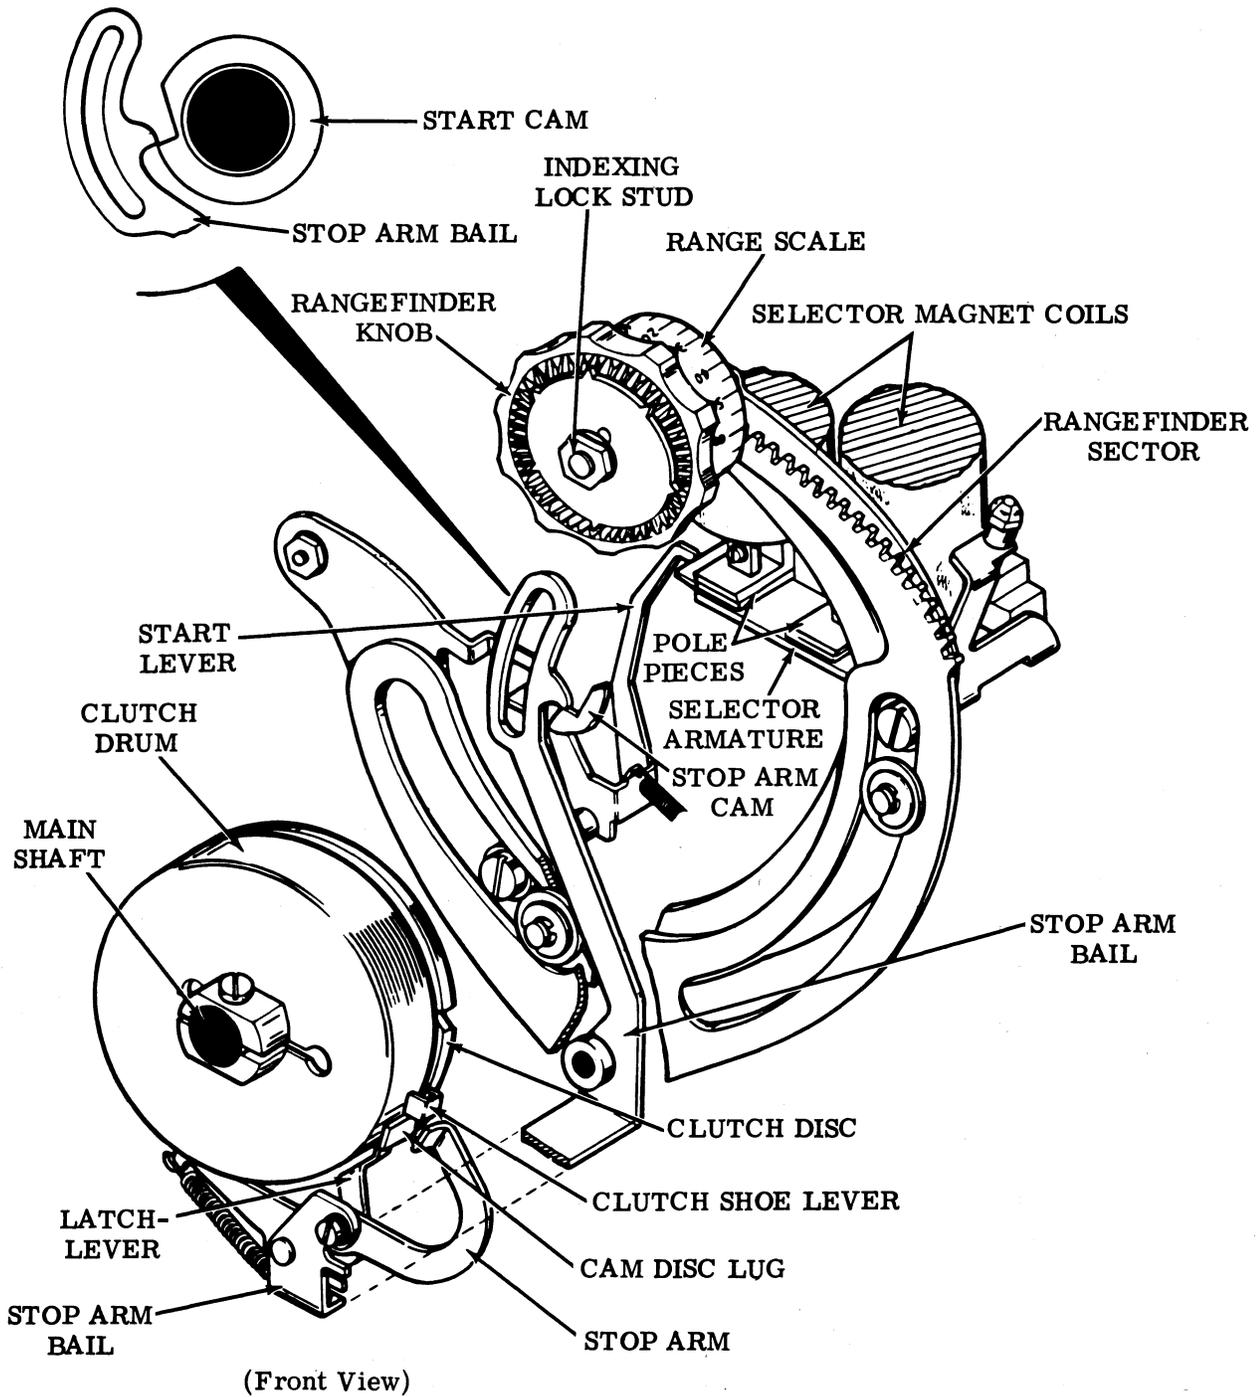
Rangefinder and Selecting Cam-Clutch Assembly
